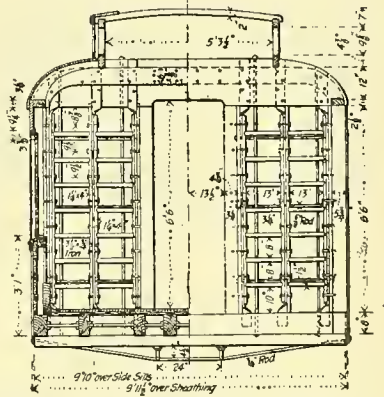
Half Transverse Section and Half End Elevation of Framing.
